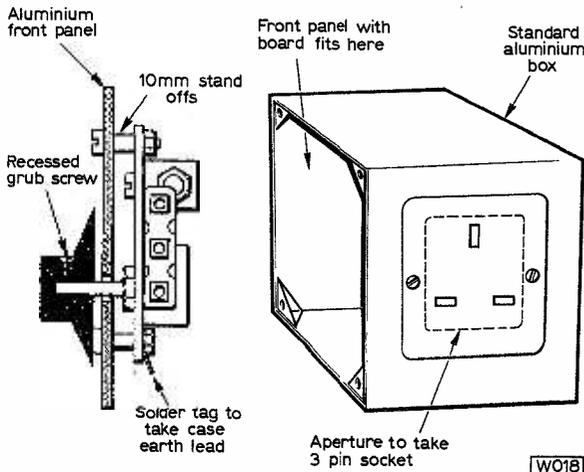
Suggested "safe" method of housing the Motor Speed Controller.
